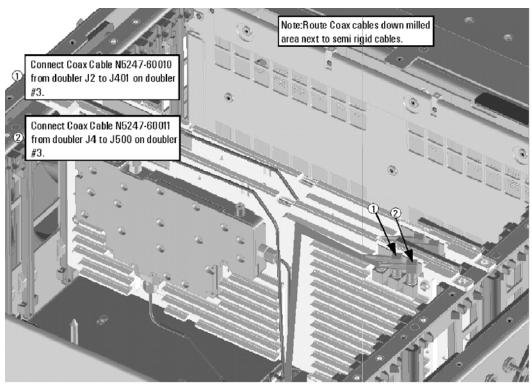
A12 40 GHz Doubler 3 Assembly Installation
